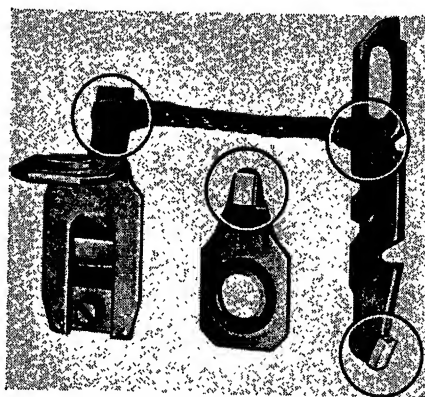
An assembly of small parts involving copper to copper, copper to bimetal, and copper to silver-alloy joints is successfully welded in production using simplified precision control
